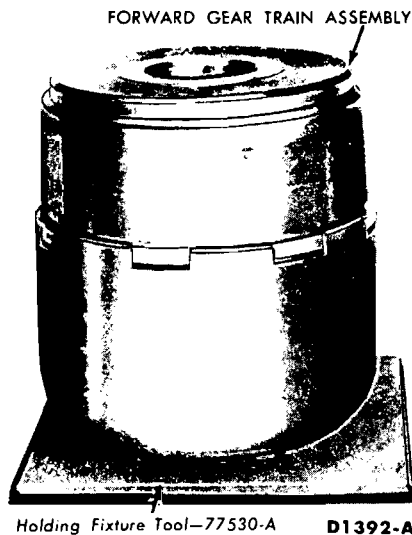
Forward Part of Gear Train Positioned in Holding Fixture
